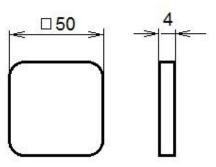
Injection molded piece dimensions used for warpage measurement.
